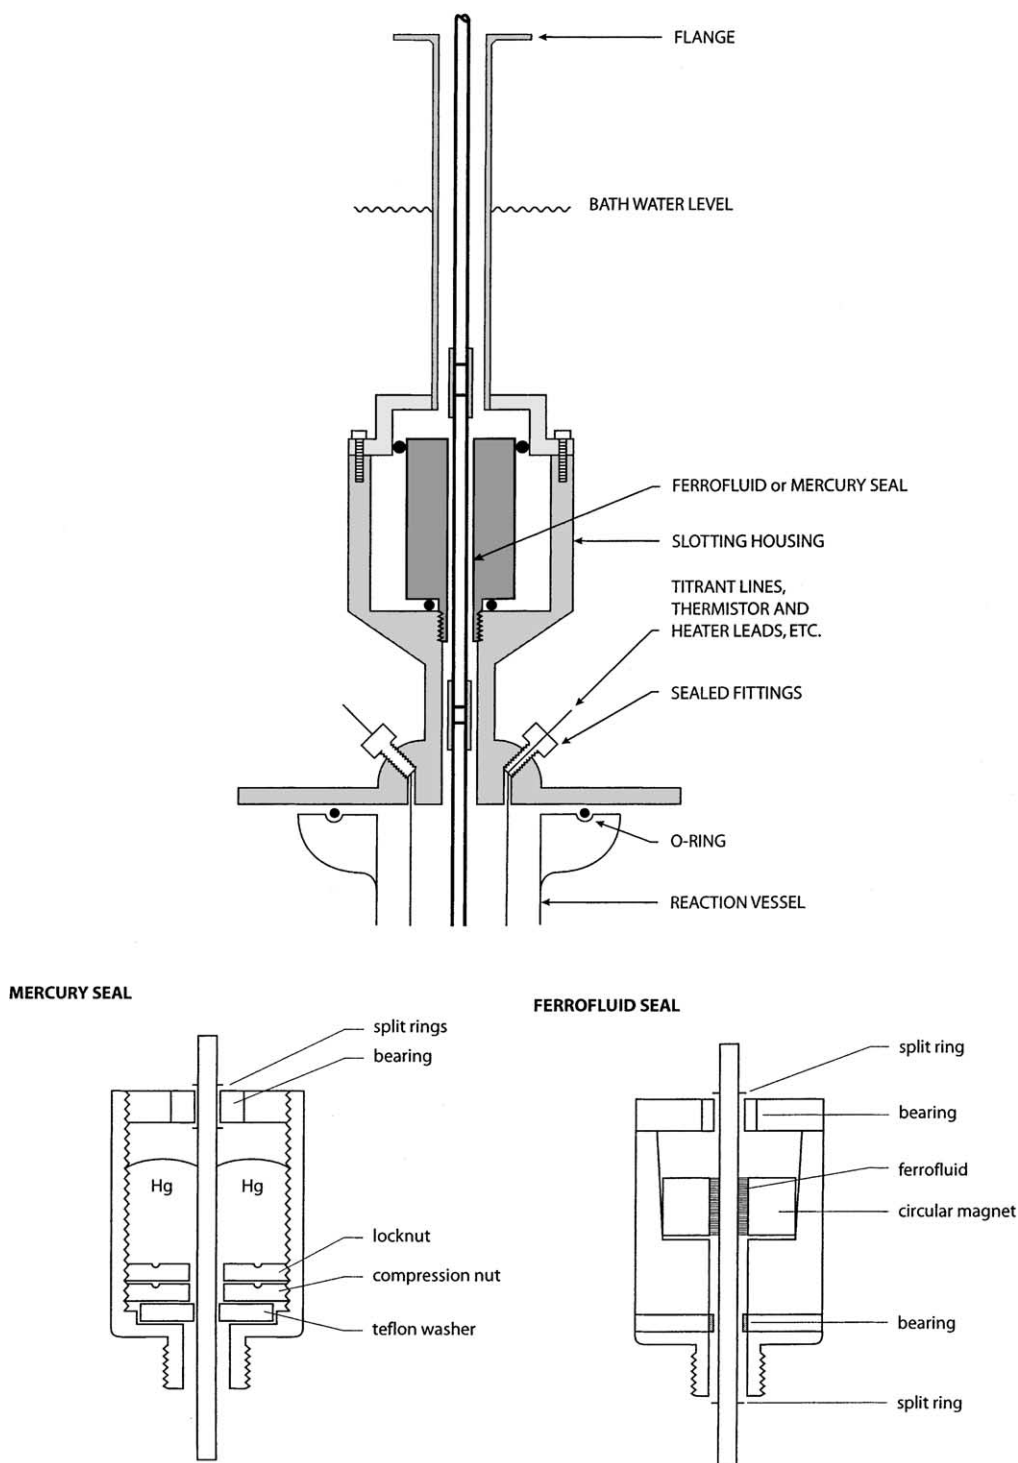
Designs for ferrofluid and mercury seals on a rotating shaft.
